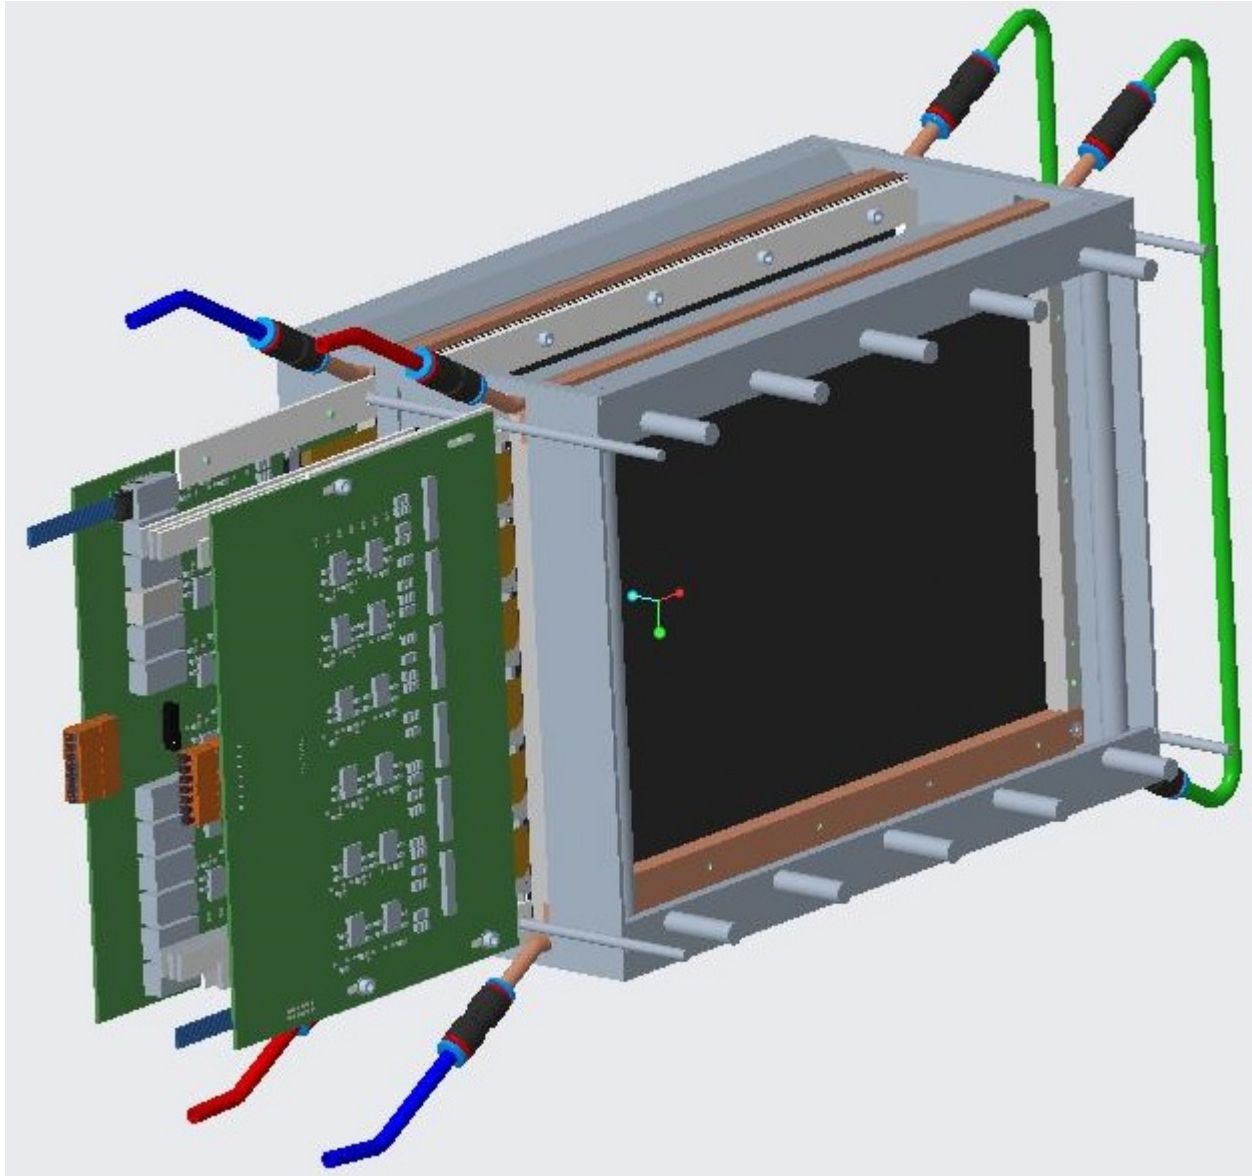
The final design fully assembled, complete with bolts/rods for attaching to the calorimeter and side plates. The left side plate has an opening for moving the conversion layers in and out.
